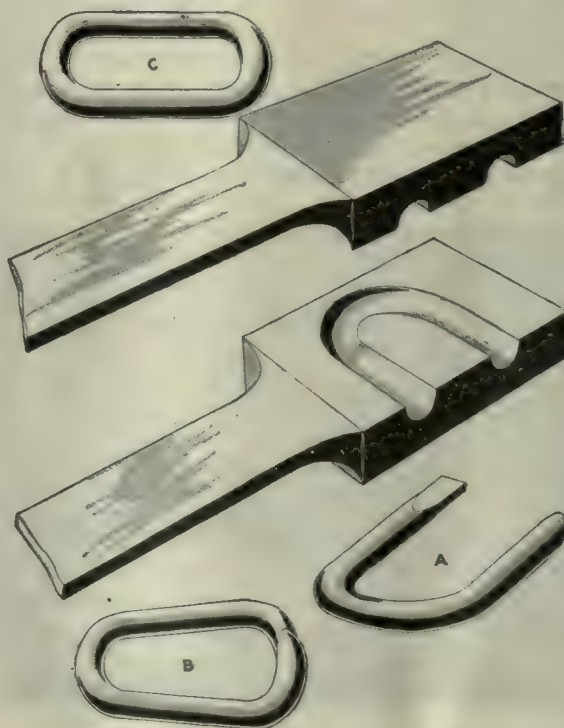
LINK WELDING WITH A SWAGE
